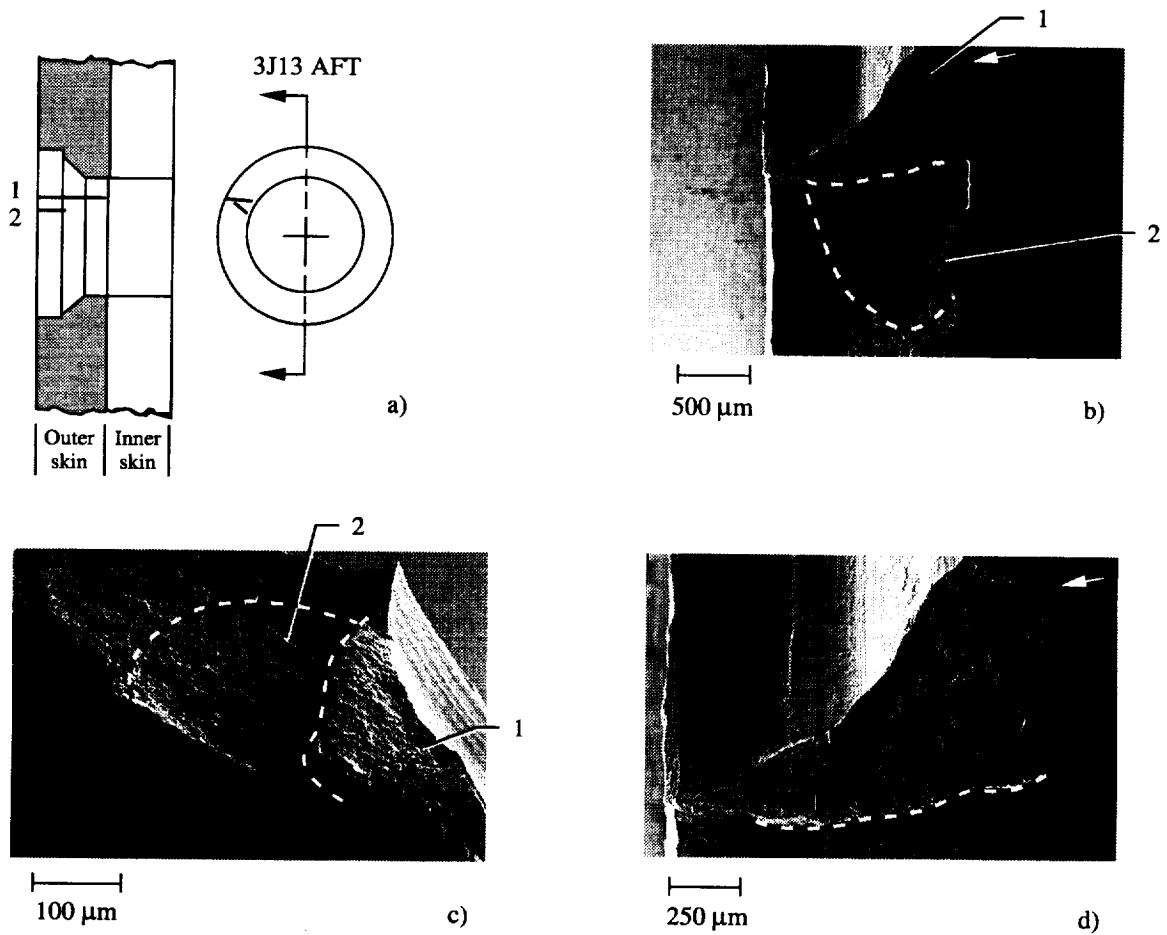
a) The schematic shows the rivet hole 3J13 configuration and the location of two outer skin fatigue cracks (1 and 2) oriented in the aft direction and about the 10 o'clock position. b) The SEM micrograph shows the fatigue crack at the rivet hole (top). The micrograph reveals that cracking occurred along two fracture planes (1 and 2). The brackets and arrow mark the likely crack initiation region for cracks "2" and "1", respectively, along the faying surface. The nearly horizontal dashed line near the middle of the fracture surface marks the region where both cracks coalesced. The dashed line extending to the bottom of the micrograph marks the final fatigue crack front. c) The SEM micrograph shows the fatigue crack surfaces of cracks "1" and "2" at an oblique angle. The dashed line on the left marks the final fatigue crack front. The near vertical dashed line marks the region where the cracks coalesced. d) The SEM micrograph shows the fatigue crack surface at the rivet hole shank and crack "1" in Figure 9.25.b. The arrow marks the site of crack initiation.
